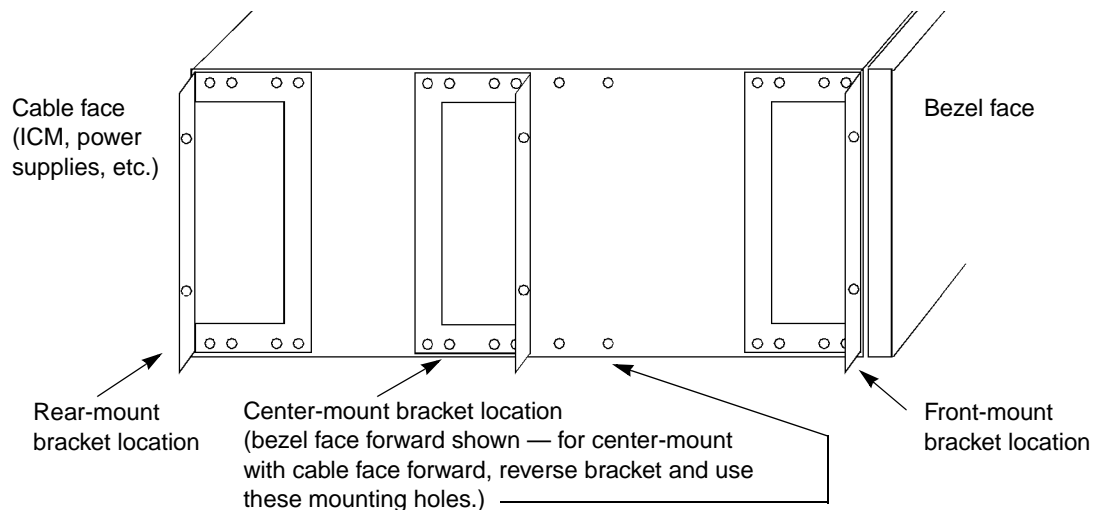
Bracket Locations (19-inch Brackets Shown)
